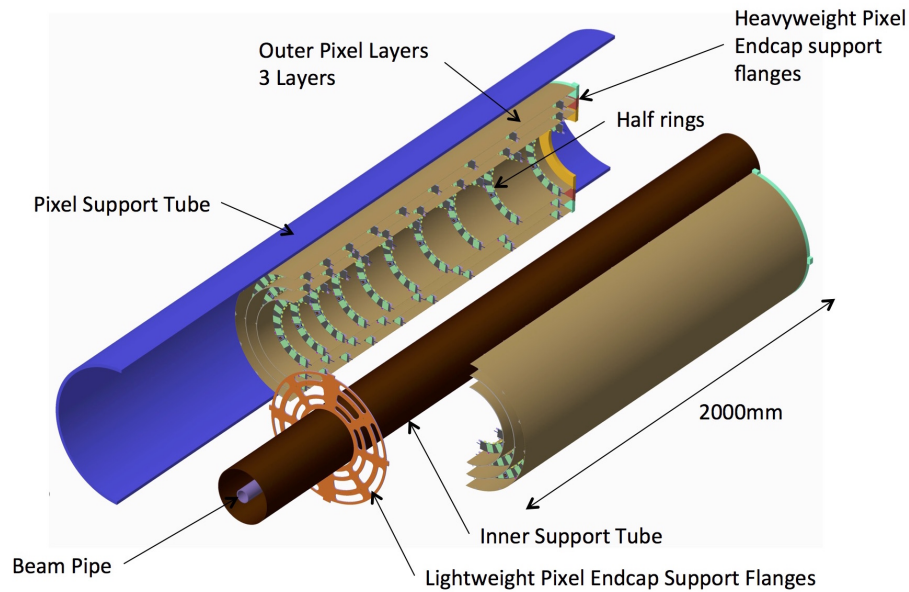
Exploded 3D drawing of one Outer End-cap.
